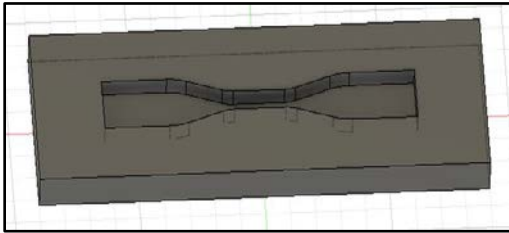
3D isometric view of the die and punch are shown in figure 5 and 6 re3D isometric view of the die.
